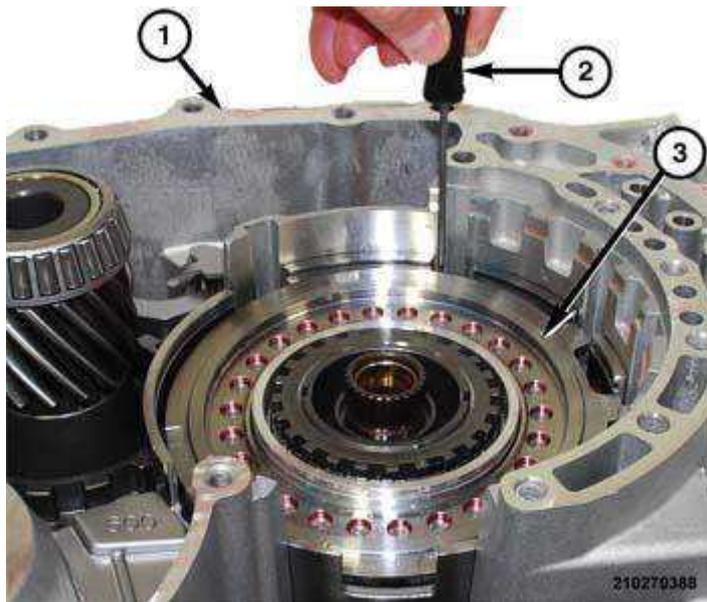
Underdrive Brake Piston & Underdrive Brake Chamber
